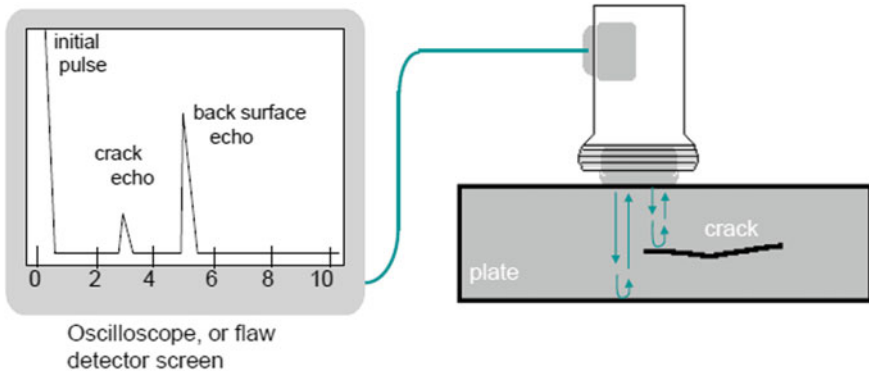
Detection of cracks in samples using oscilloscope or flaw detector screen
